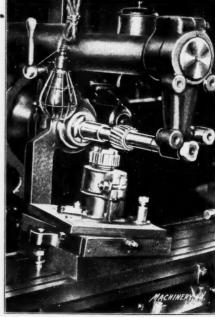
Milling the Clearance on the Clutch Teeta of a Drive-gear Sleeve
